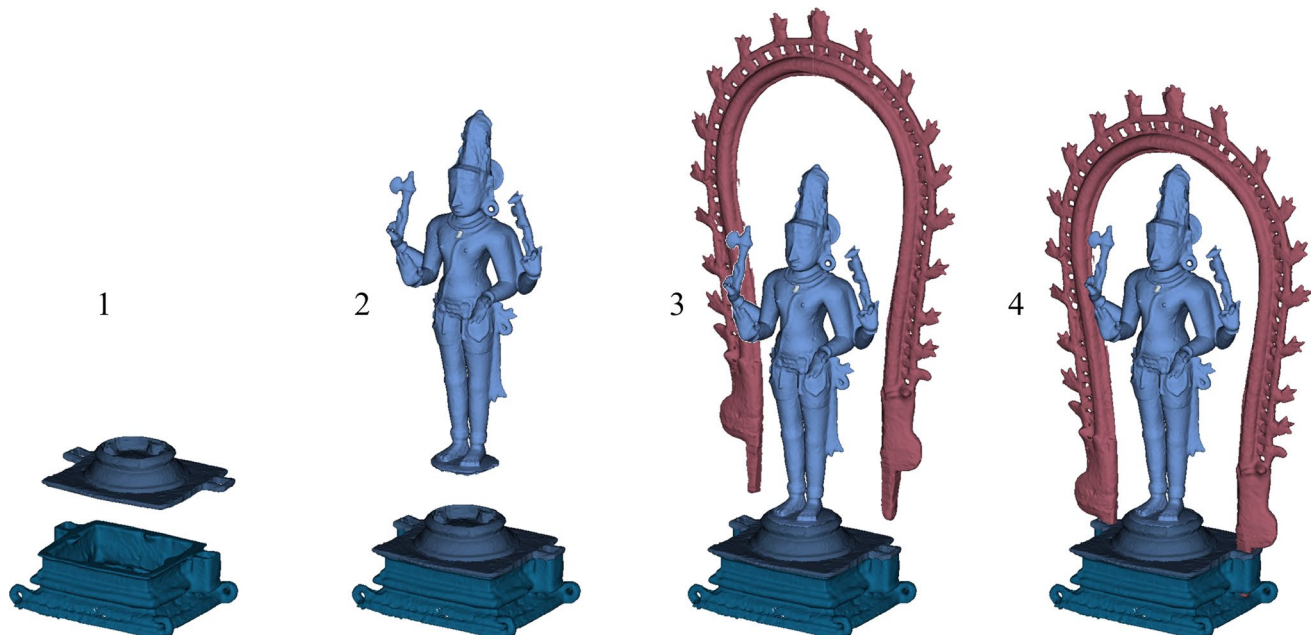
Shiva statuette assembly of the presumed independently cast portions. 1 Hard soldering; 2 mechanical joint; 3 mechanical joint and/or hard soldering
